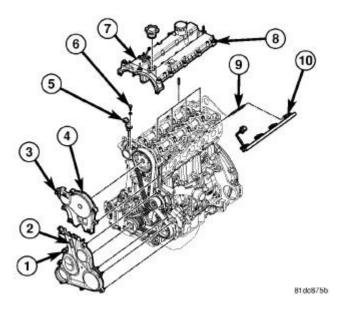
Upper And Lower Front Covers Courtesy of CHRYSLER LLC
